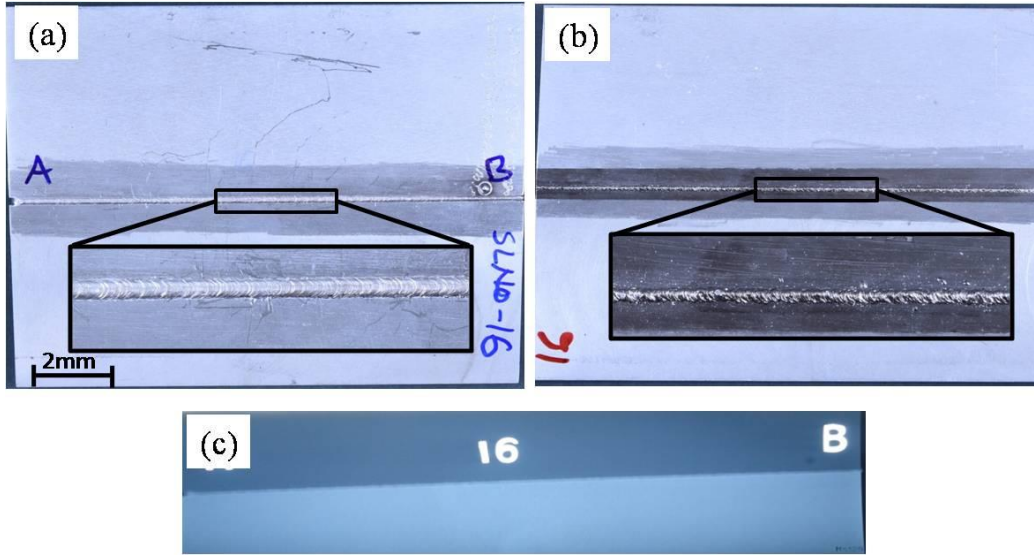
Visual appearance of weld joint (a) top side (b) bottom side (c) X-ray radiograph (accelerating voltage 55kV, beam current 35mA and welding speed of 1100mm/min, gun to work distance of 240mm.)
